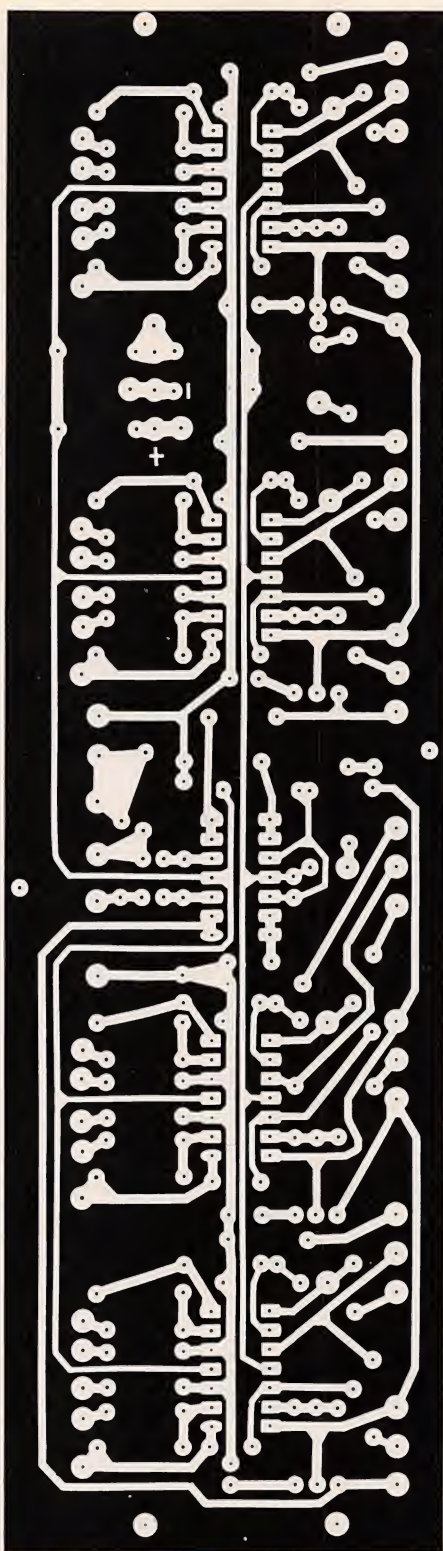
Actual-size etching and drilling guide for the main printed circuit board.
